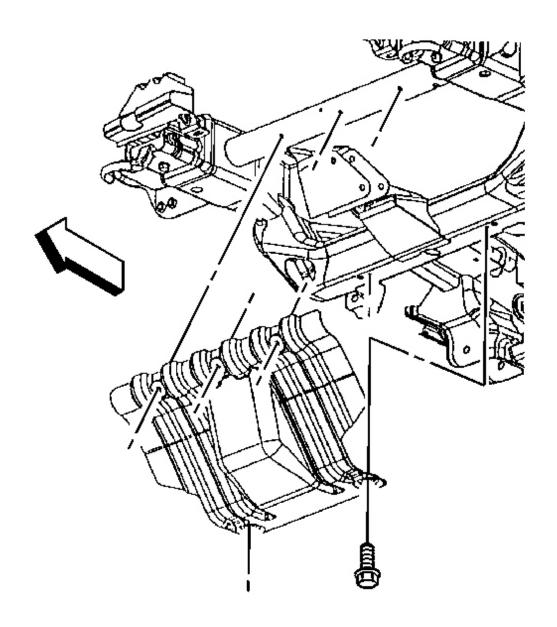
View Of Engine Protection Shield Courtesy of GENERAL MOTORS CORP.
